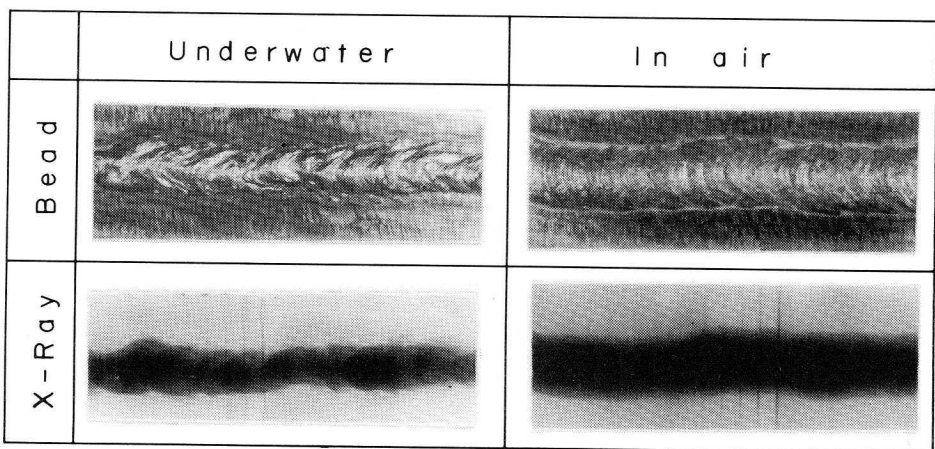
Appearance, bead and X-ray inspection of welds obtained underwater and in air (HT60+D5003)
